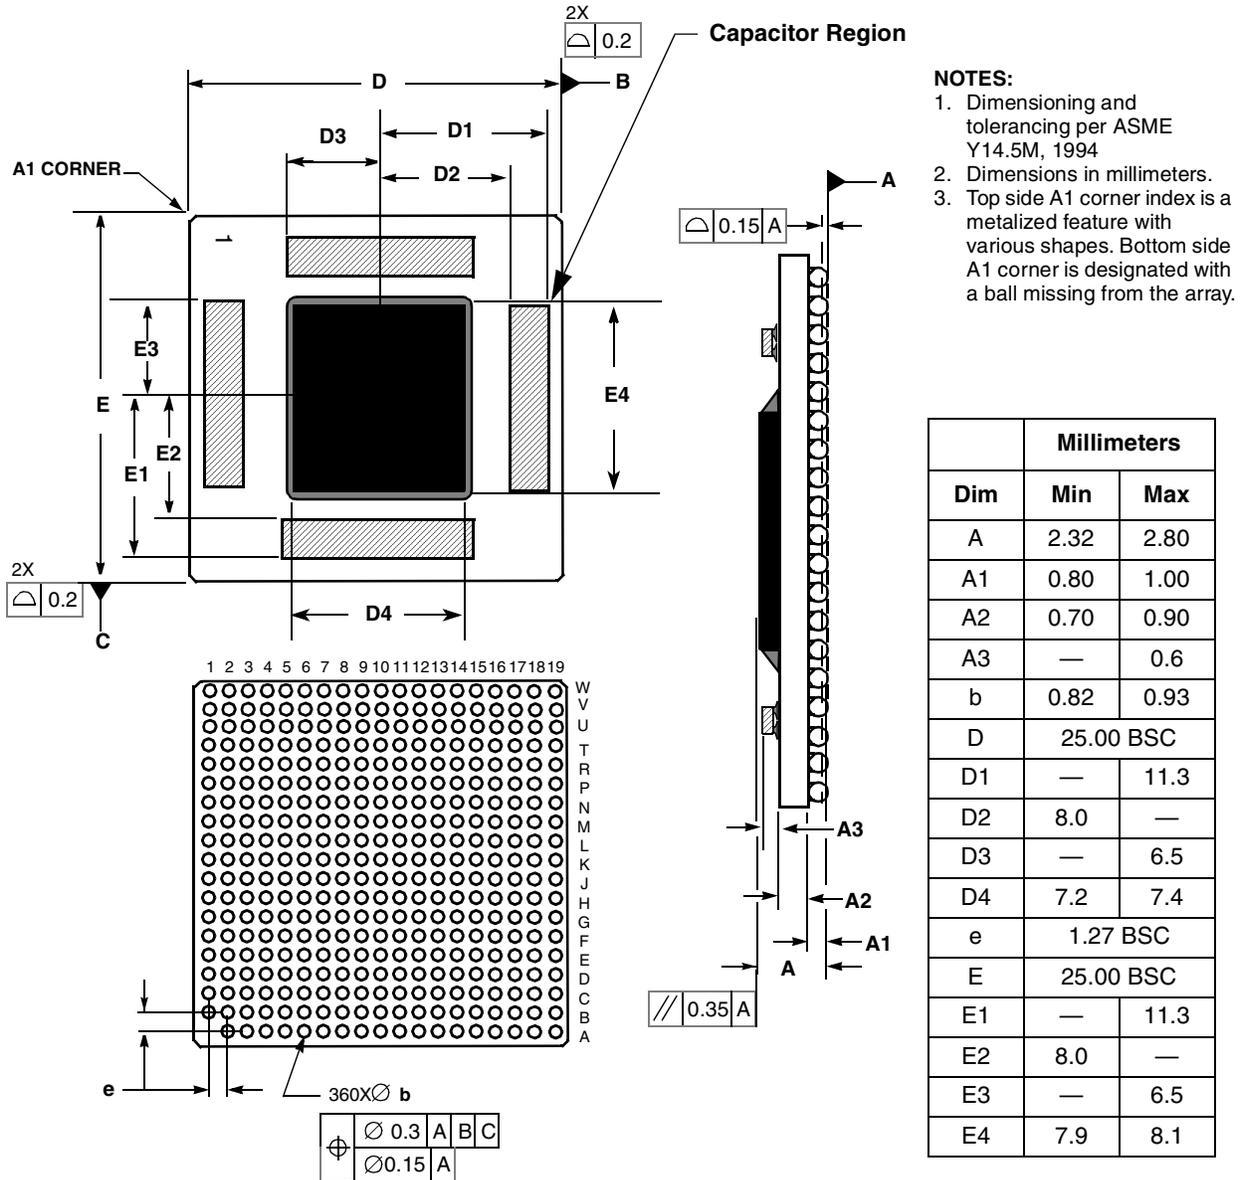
Mechanical Dimensions and Bottom Surface Nomenclature for the MPC7448, 360 HCTE BGA Package
